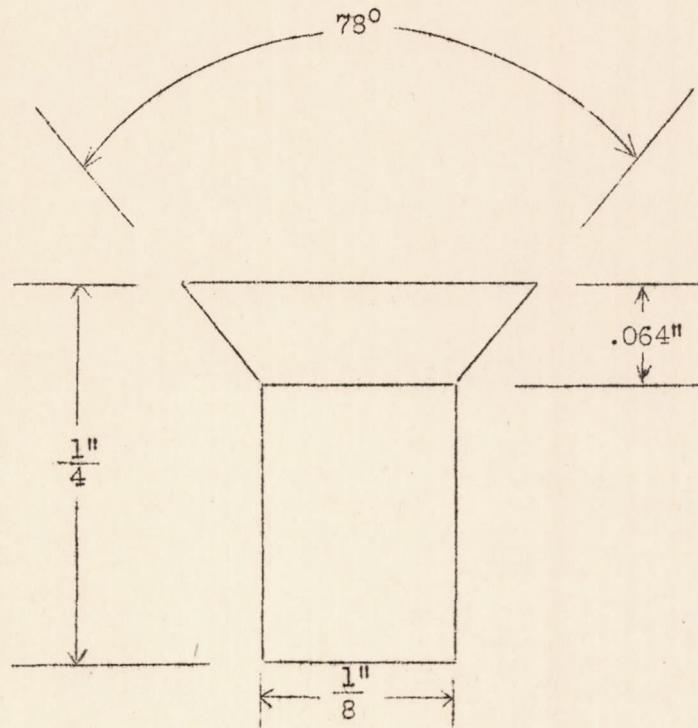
Dimensions of machine-countersunk rivet and angle of countersink used in riveting methods A, B, C, and D.
